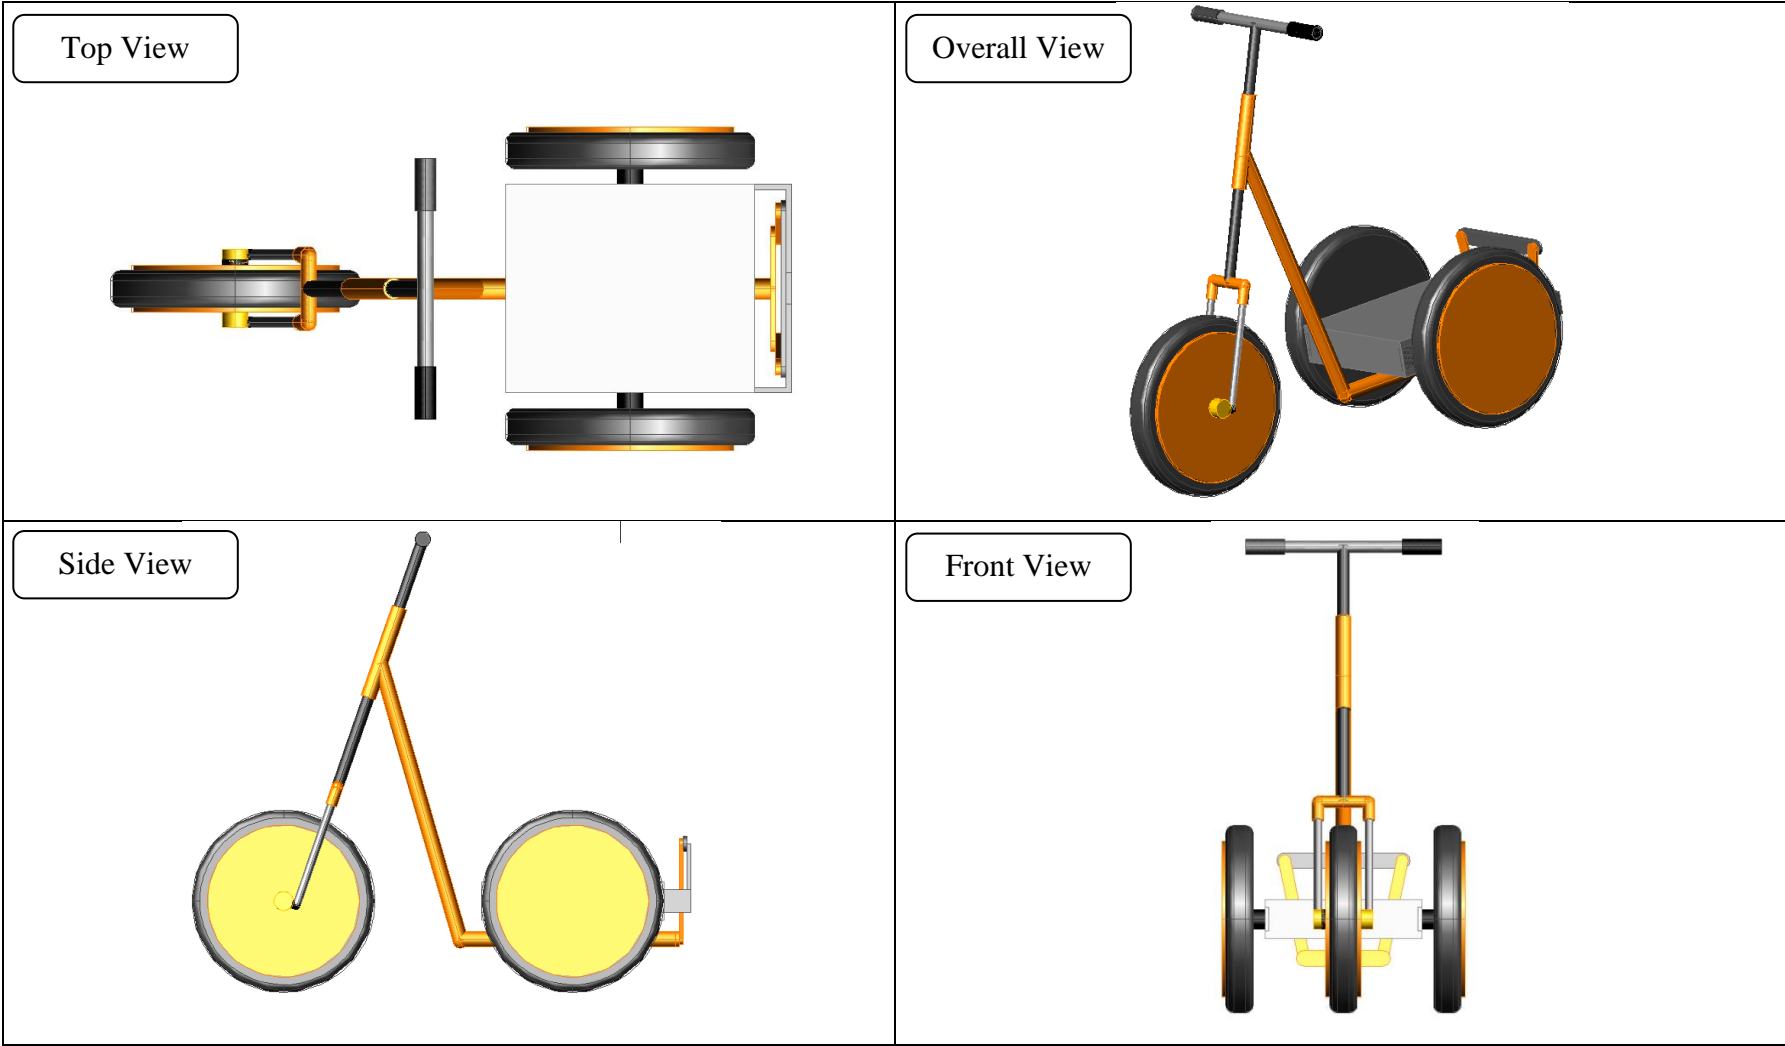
Auto CAD Drawing of the Conceptual Design (Drawn to real Dimension)
